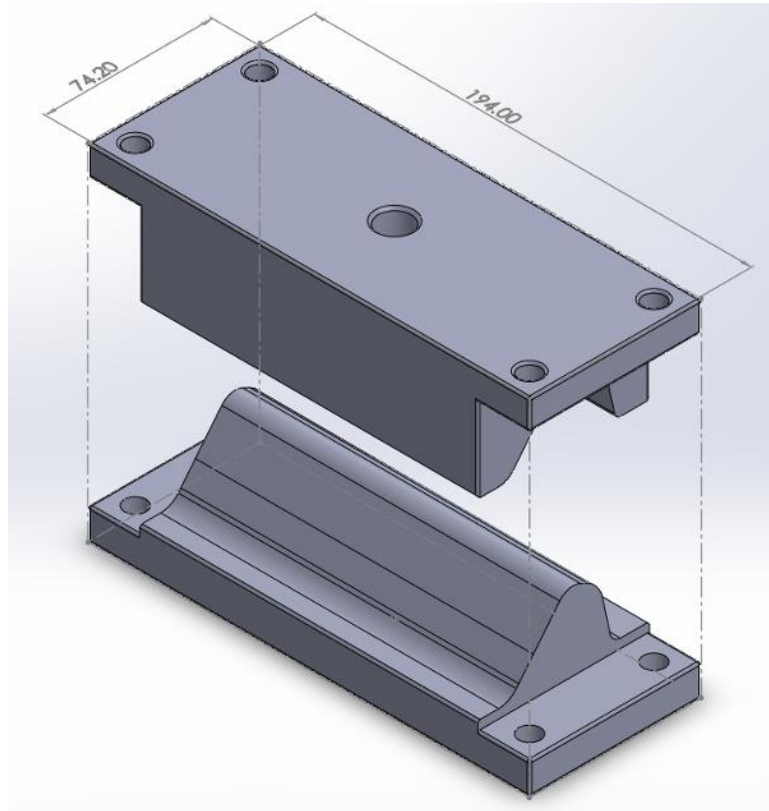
CAD drawing of solid tool for Scenario 1 and 2
